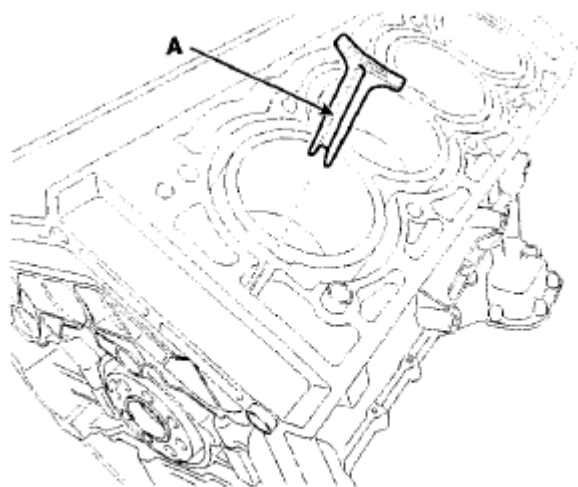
Identifying Cylinder Block Bank Cover And Gasket
